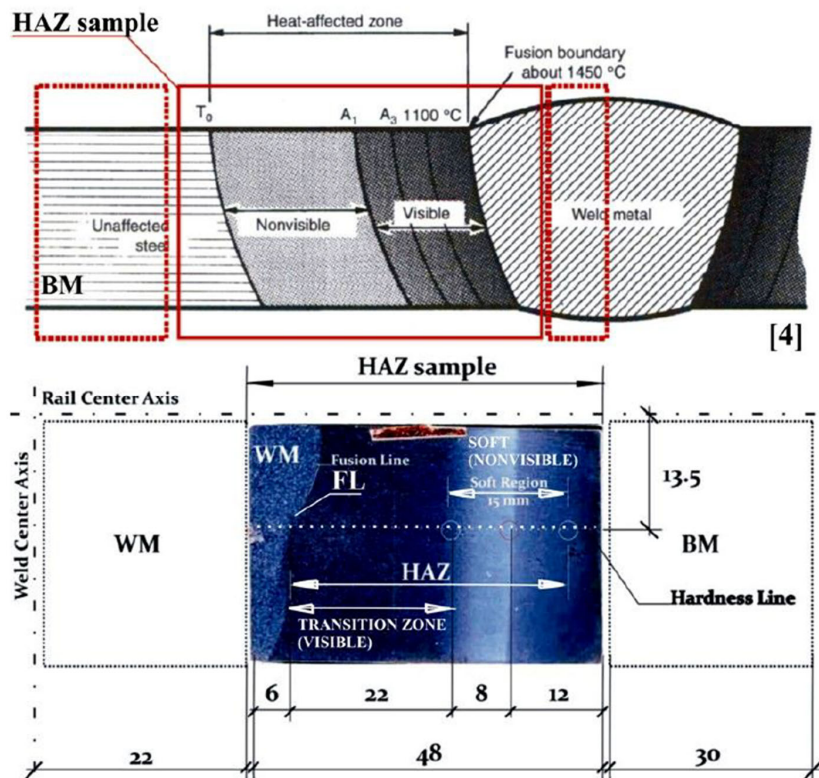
Critical Zones near Thermite Weld [15]
